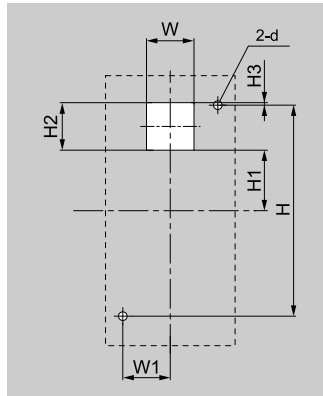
Panel Cut-Out Dimensions for Mounting to Exterior of Control Panel
